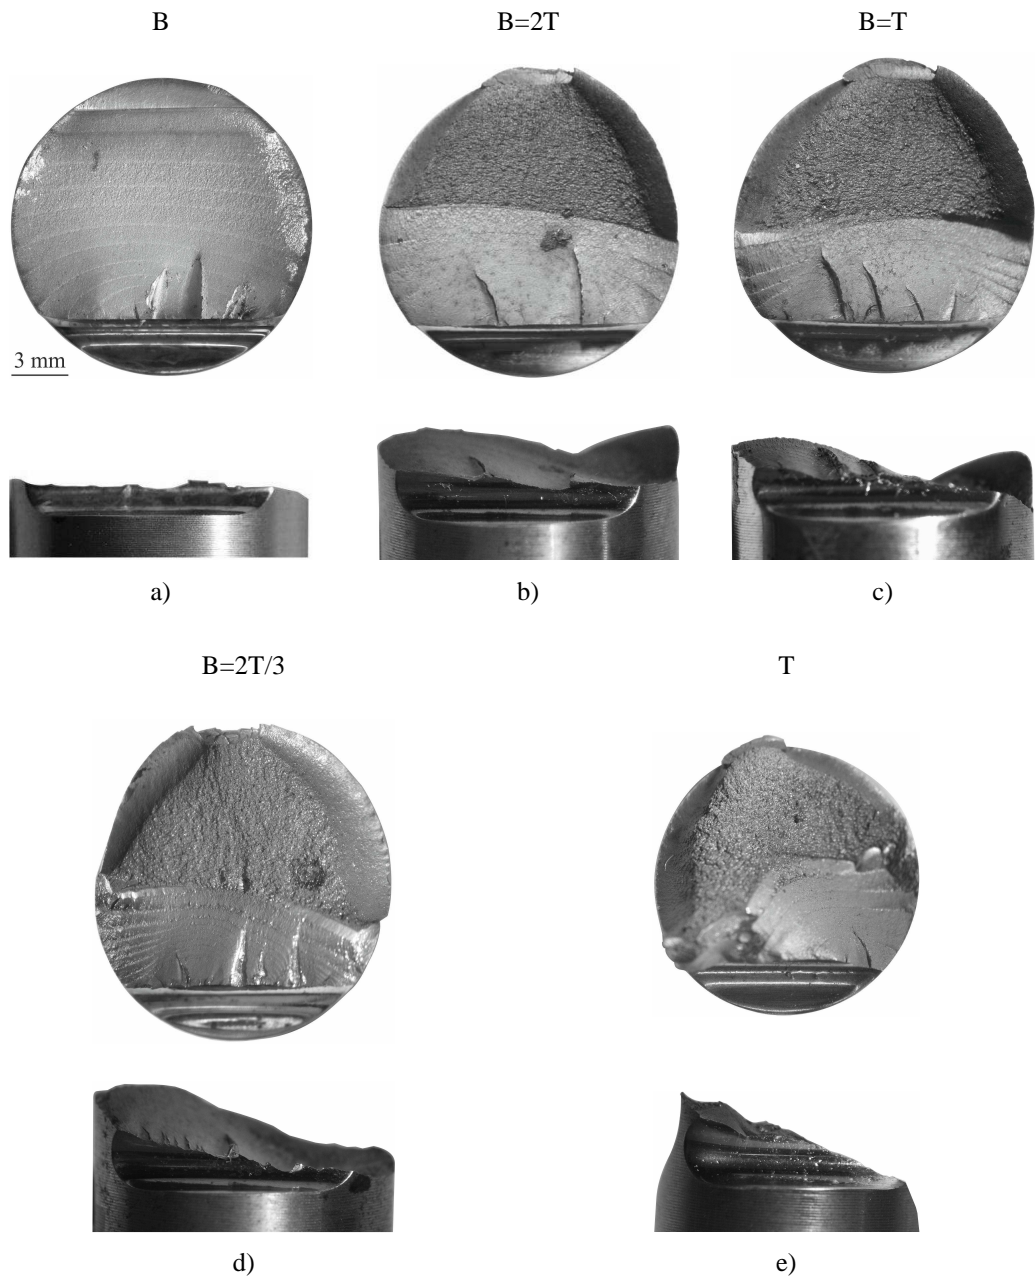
Fracture surfaces of fatigue crack front marking tests for the different loading paths.
